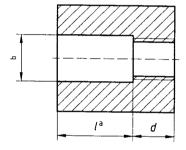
Measuring device for verifying run-out specified in Figures 42 and 43
